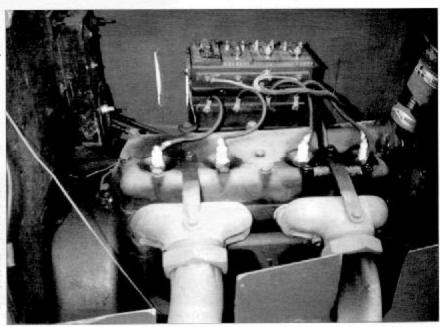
This plate shows the castings that bolted to the stock Model T engine to make up the outside "PACO exhaust" shown in several ads.
